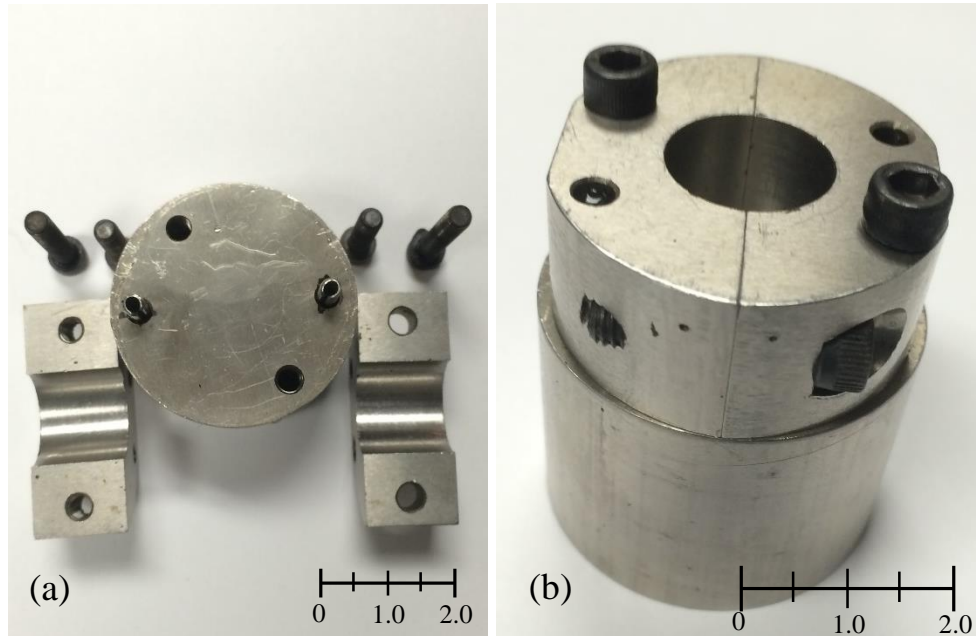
Stainless steel mold used for manufacturing specimens from shingle sealant material in: (a) disassembled form; and (b) assembled form. Ruler units in centimeters.
